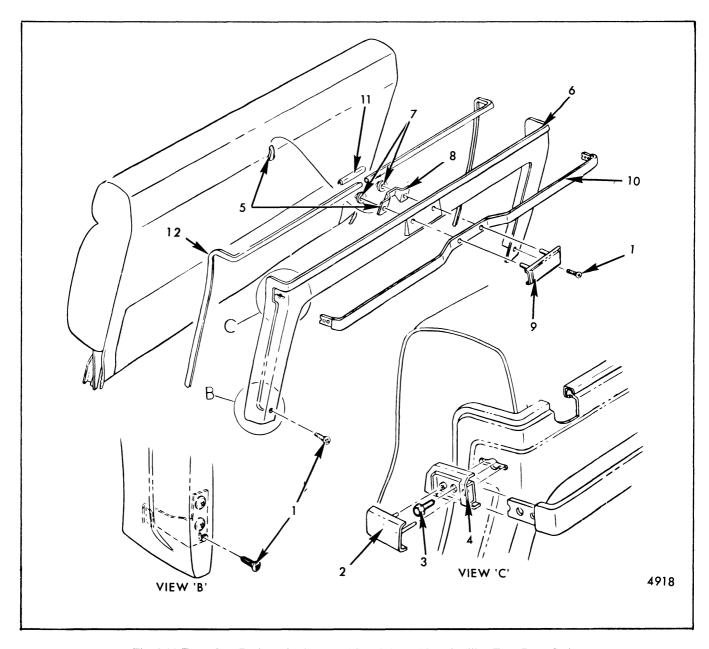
Front Seat Back Assist Strap and Panel Assembly - Cadillac Four-Door Styles
